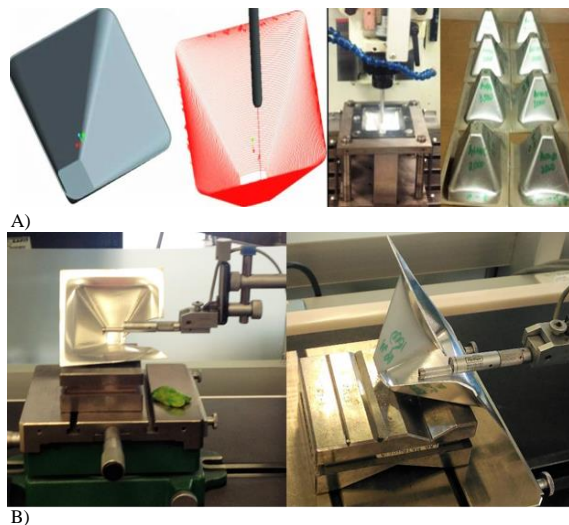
(A) CAD design, CAM paths, assembly and geometries obtained.
